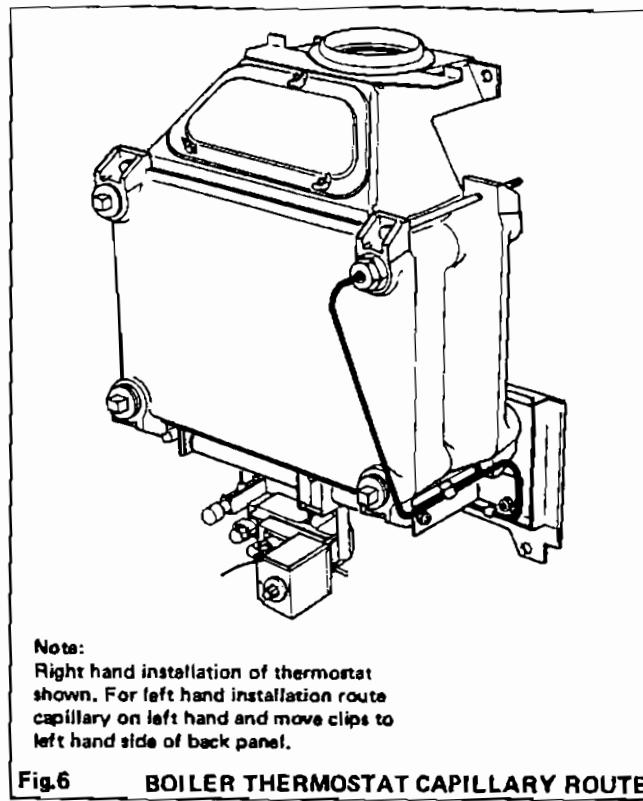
BOILER THERMOSTAT CAPILLARY ROUTE
